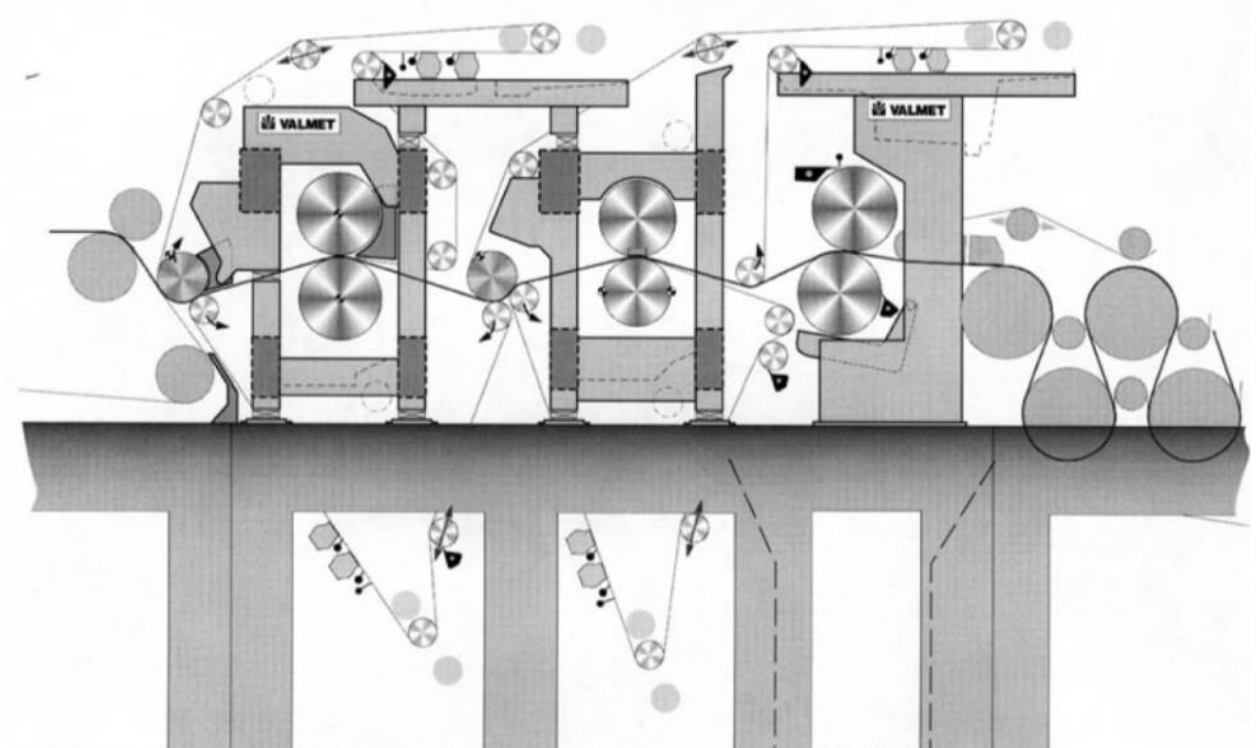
Typical press section of folding boxboard machine (Paulapuro, 2008)
